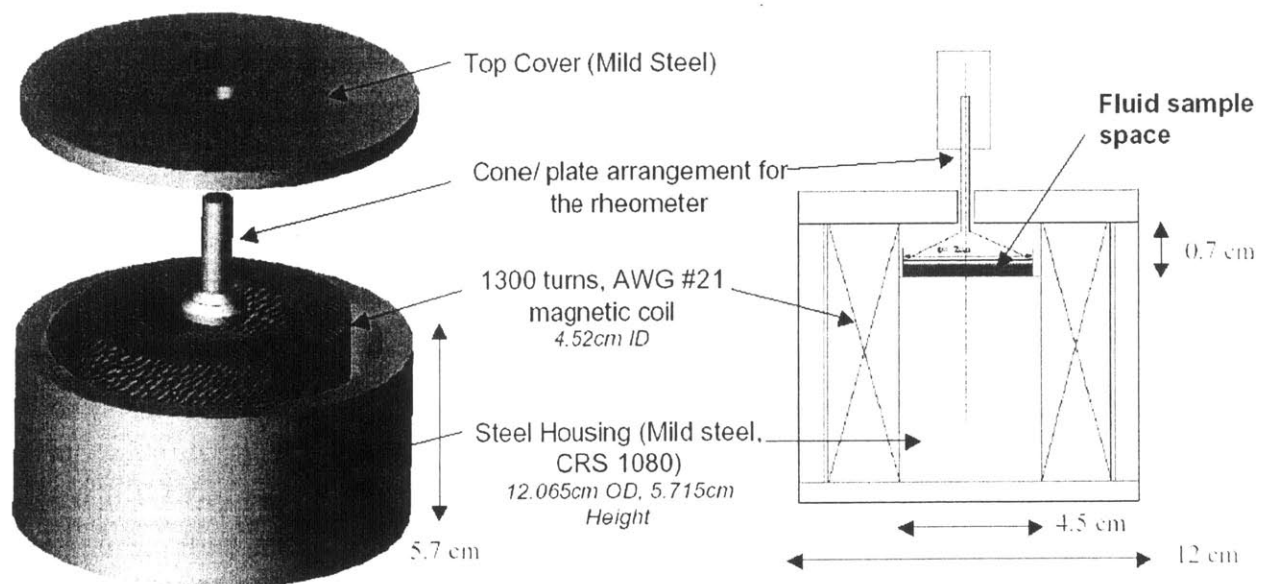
Custom designed MR fixture for AR2000 Rheometer
